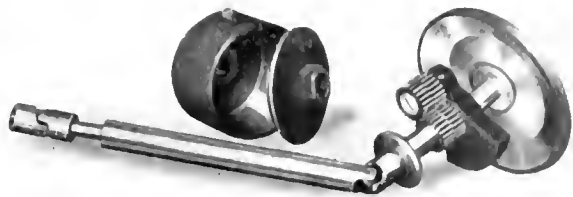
The Simple Gear-box Parts of the Chicago Hand Miller
